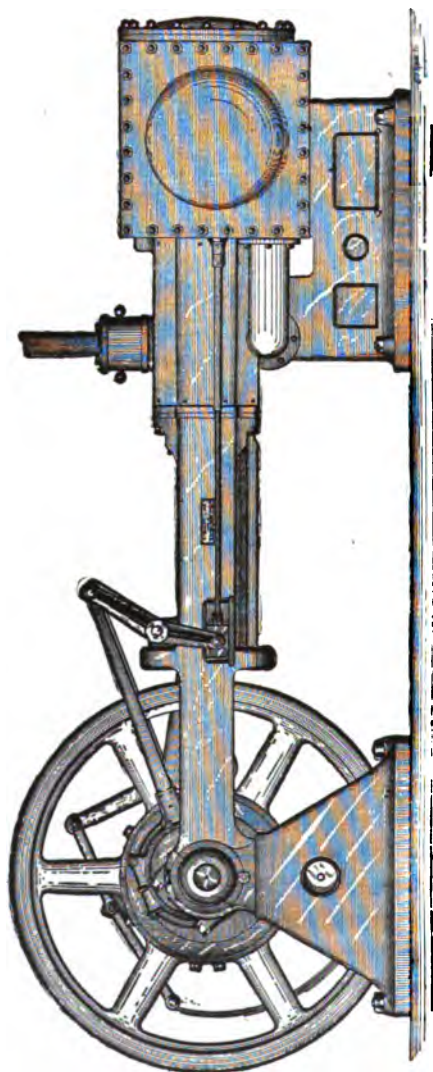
THE SWEET COMPOUND STRAIGHT-LINE ENGINE.
